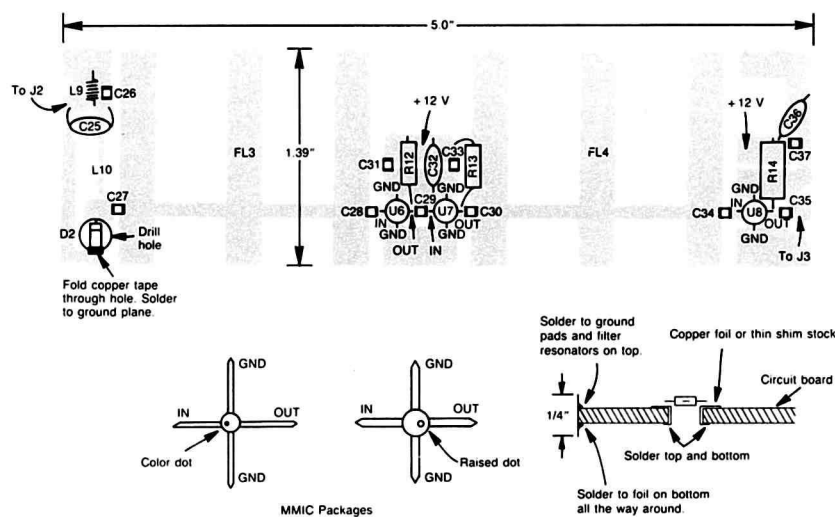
Part-placement diagram for the $\times 4$ multiplier board (not shown actual size). All components mount on the etched side of the board.
